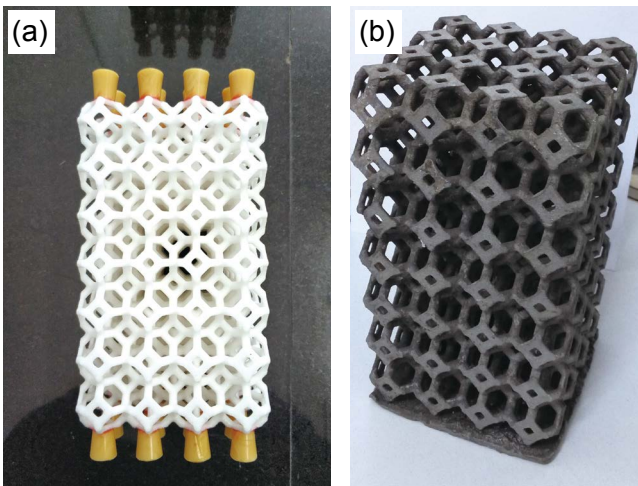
Precursor (a) and sample (b) of 316L lattice structures fabricated by additive manufacturing combined with investment casting
